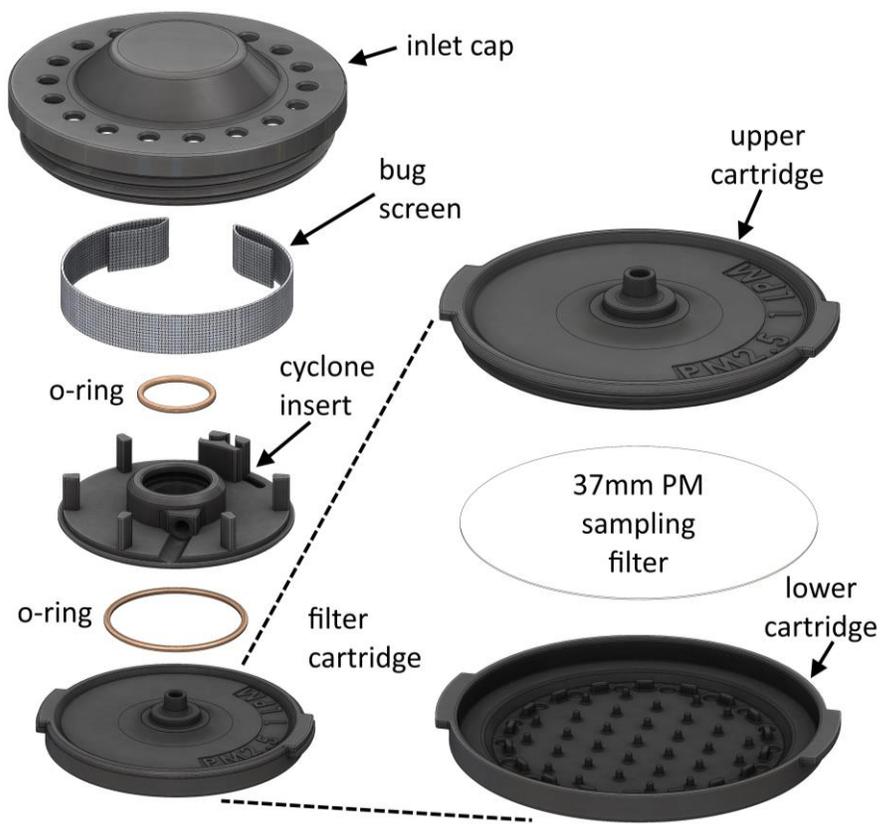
Exploded CAD view of size-selective inlet system of the AST UPAS, including breakout of the filter cartridge, showing details of filter support structures and drain holes.
